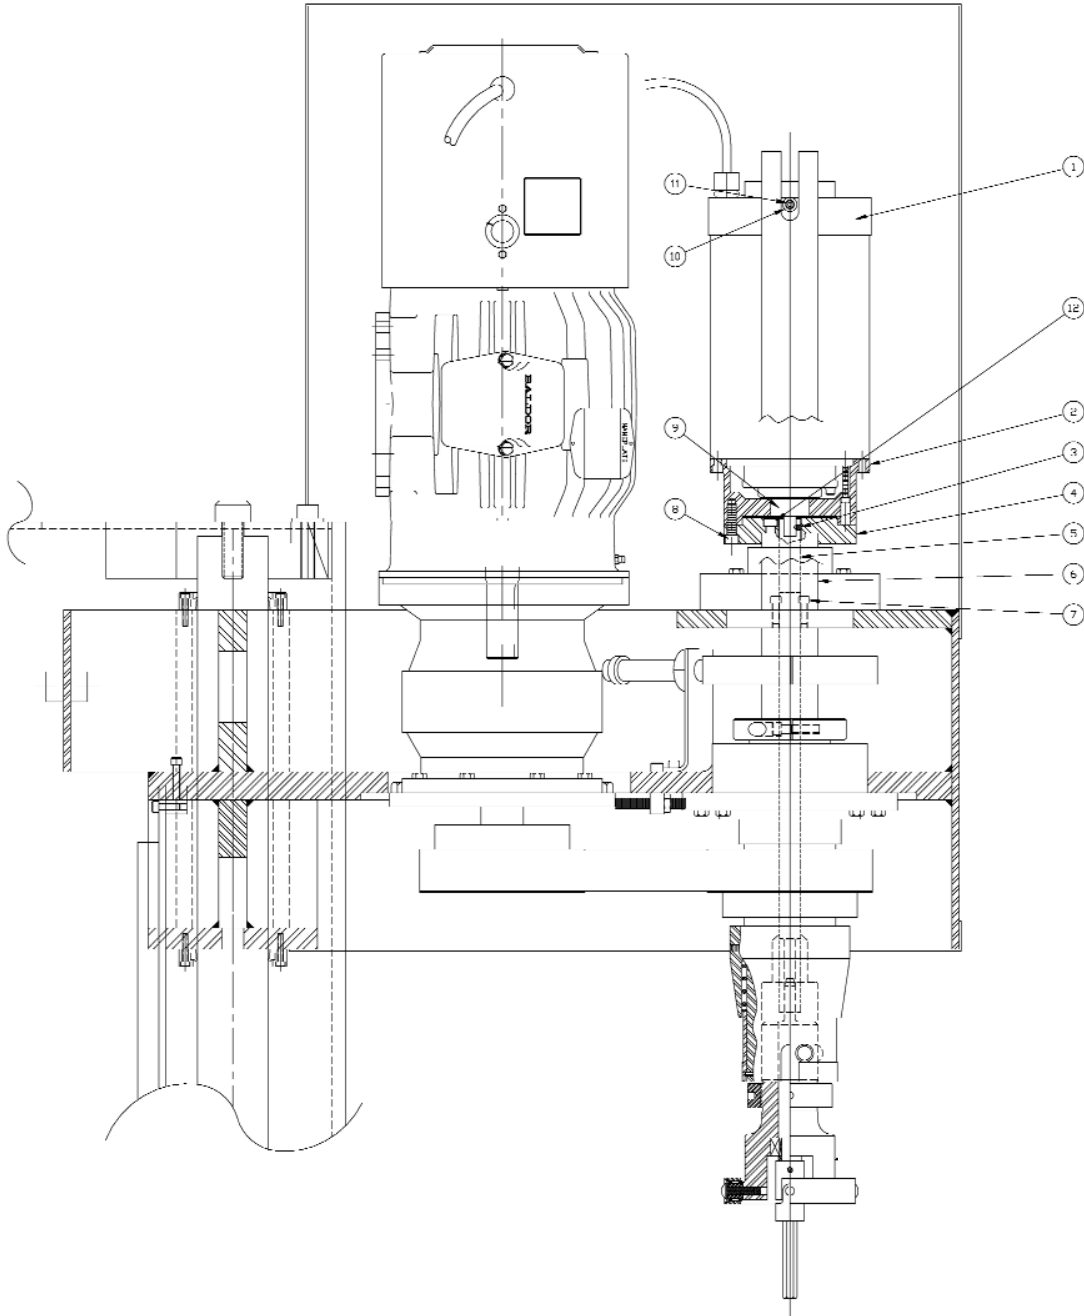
F – HYDRAULIC PUSH FEED SYSTEM ASSEMBLY
